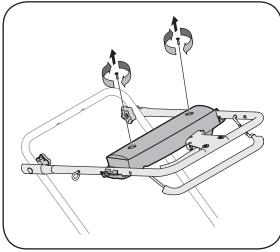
Fold down upper handle and remove two screws from back of housing.
